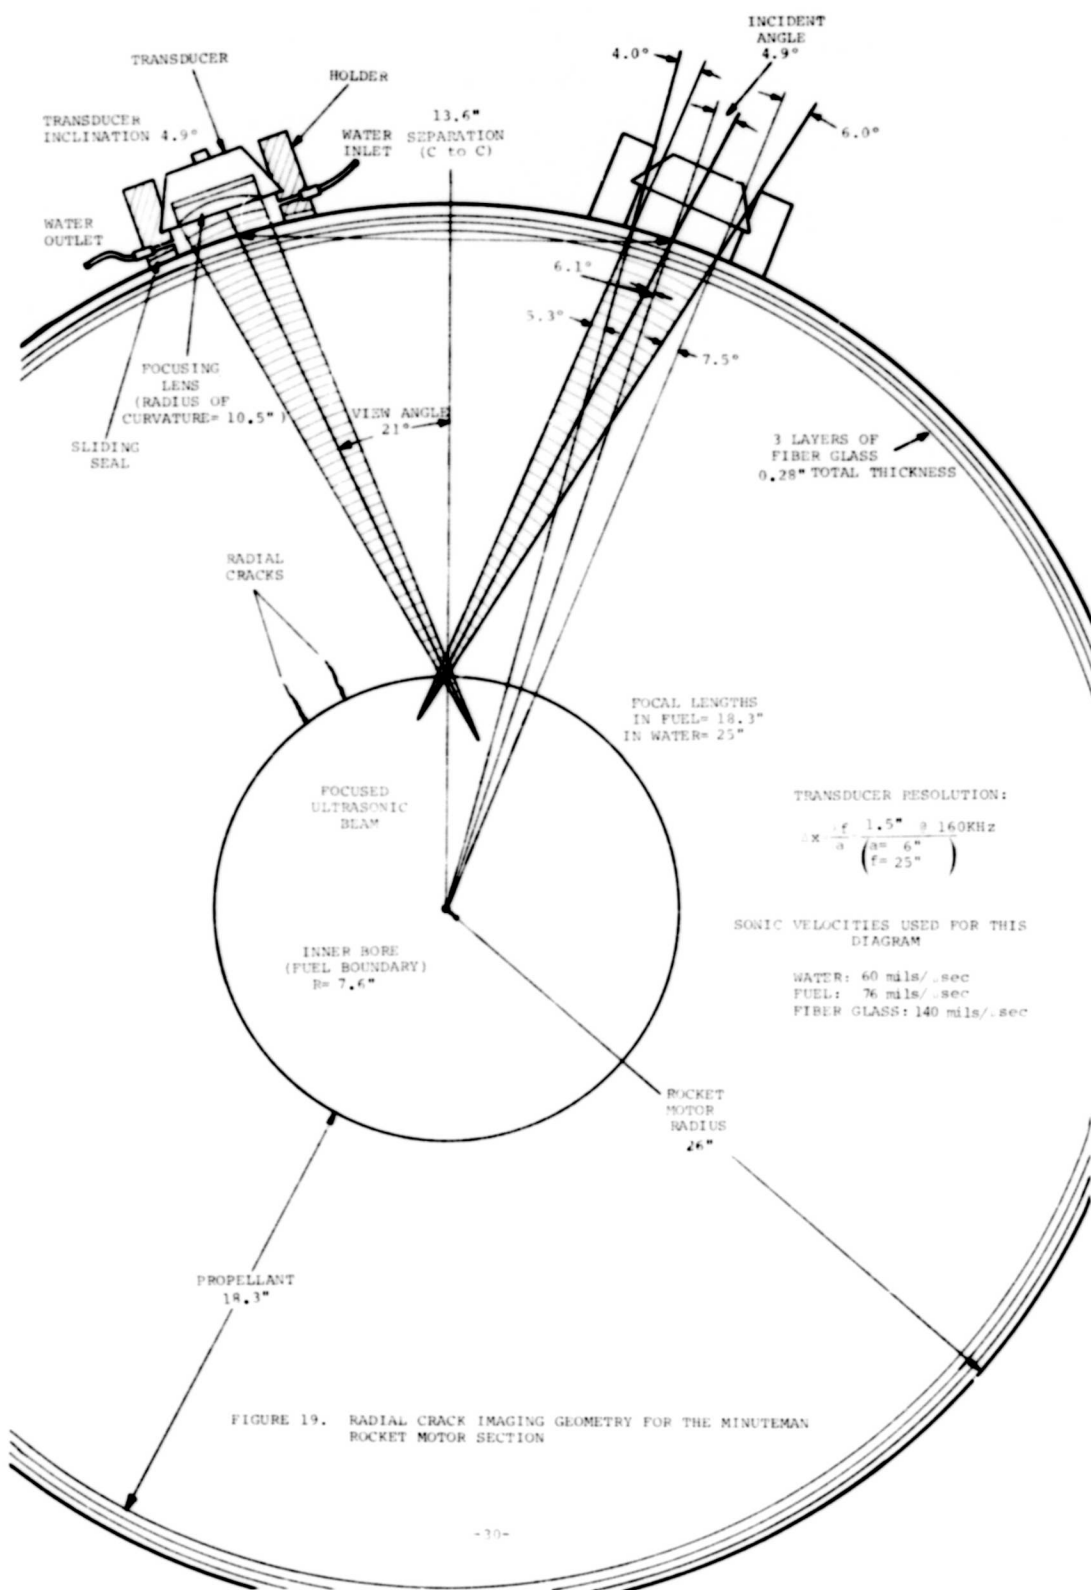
RADIAL CRACK IMAGING GEOMETRY FOR THE MINUTEMAN ROCKET MOTOR SECTION
